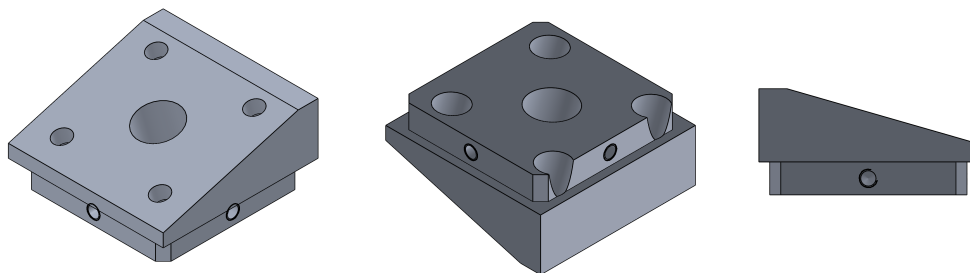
The lower connection piece that connects the main ankle cylinder to the lower square tube.
